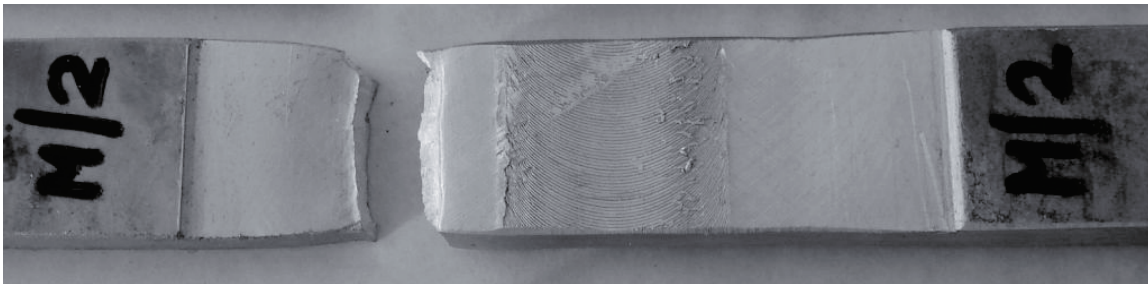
Sample view of 7020 alloy welded by FSW subjected to the static tensile test – a crack in the native material
